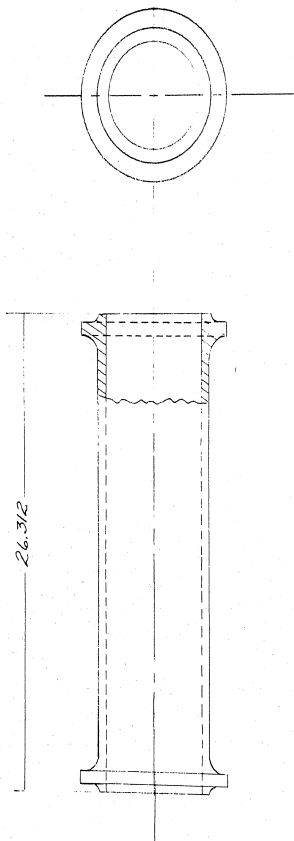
P/N 226970 - Shaft, Turbine Motor Front, Material TI-AL10-AT
